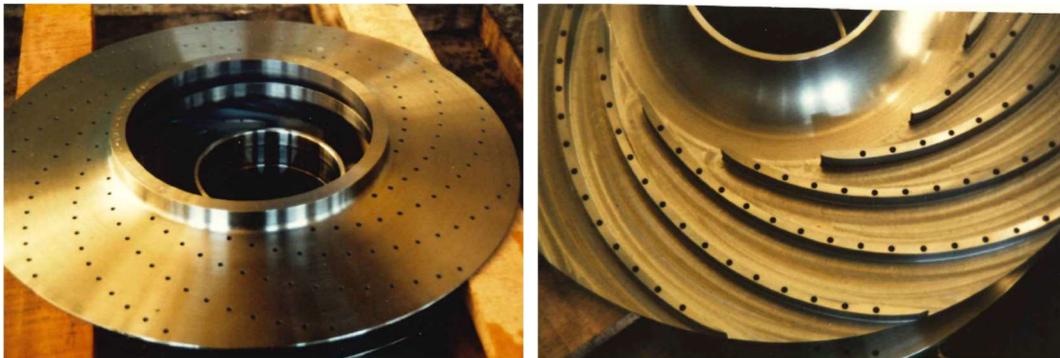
Through blade riveted impeller (cover at left, bladed disk at right)
